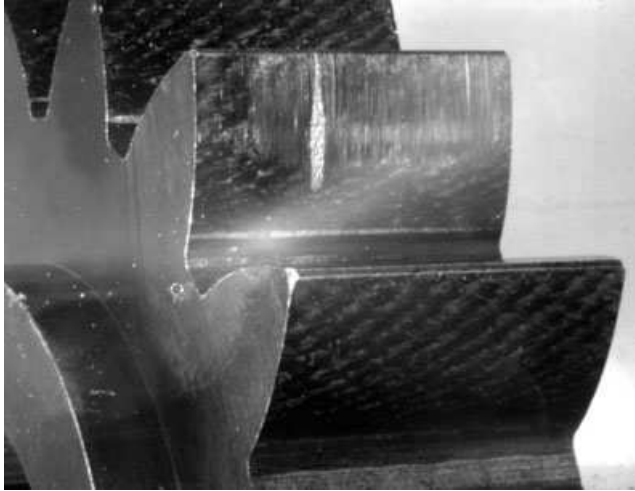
Tooth flank with typical scuffing damage (A-type, scuffing test).
